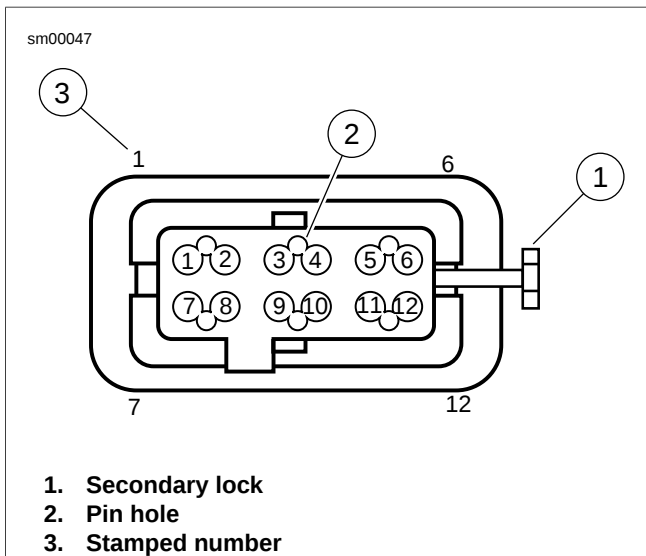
Delphi Micro-64 Sealed Connector: Housing
